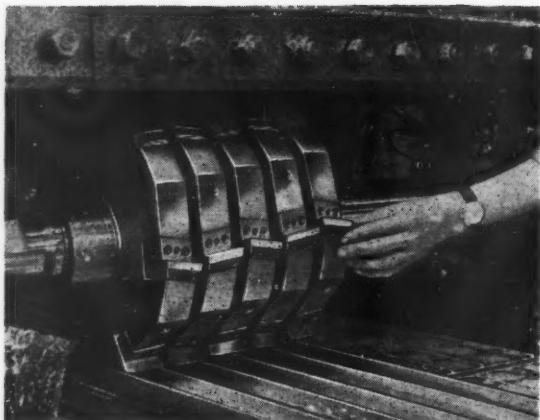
Cutter gang for milling integrally stiffened wing planks
